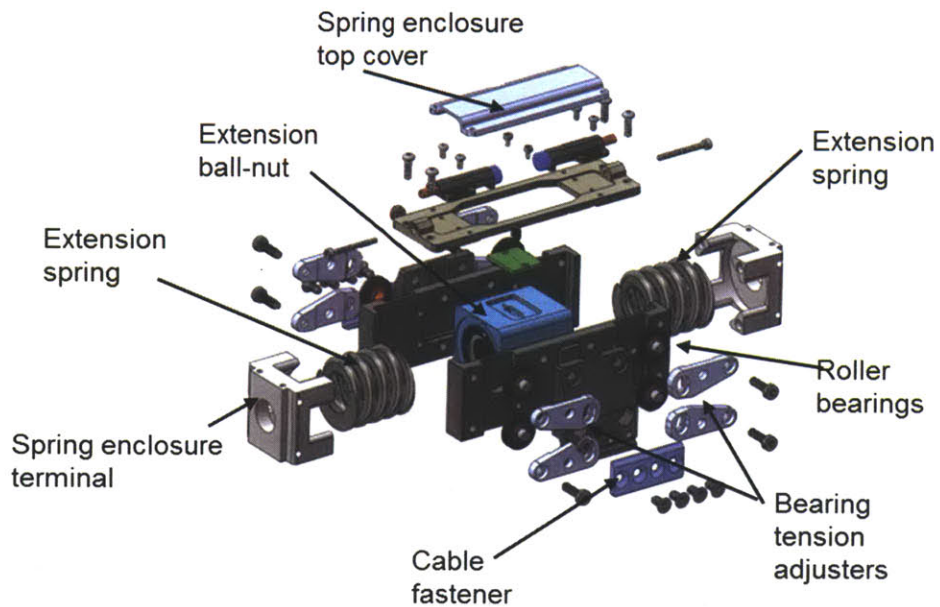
Linear carriage/spring enclosure mechanism for series elastic extension actuator.
